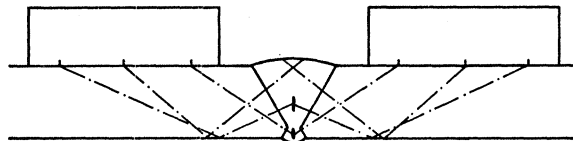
Multiple transducers are used to scan pipeline welds from several directions simultaneously. Weld height is divided into zones: root zone, middle zone and top zone, and weld width in left and right halves. A multiple gating system is used to address possible flaws according to their location once they exceed a predetermined level of reflectivity. Acoustic coupling and transparency is checked by signal transmission between the two probes. More of these probe sets are found along the pipe circumference.
